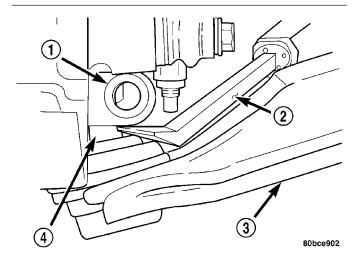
Separating Lower Control Arm from Steering Knuckle
